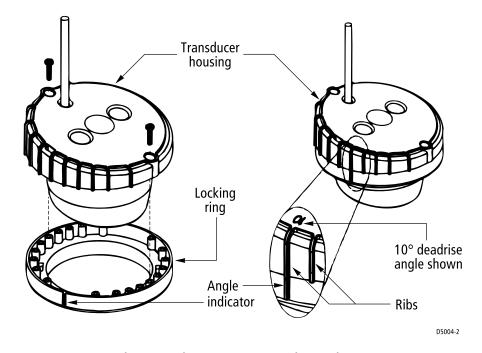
Joining the Transducer Housing to the Locking Ring
